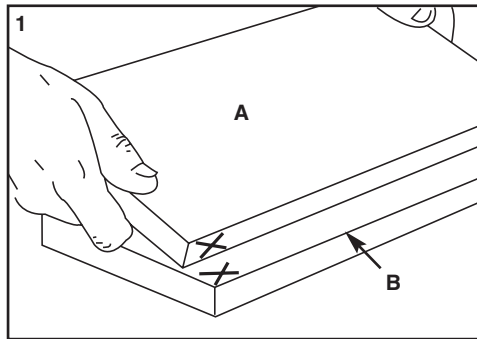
& 4: Work On Board A for all dowel joints. Clamp board A to the workbench.
